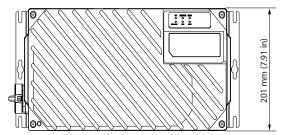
Dimensions FCD 302 0.37–3.0 kW (0.5–4.0 hp), Large Unit
